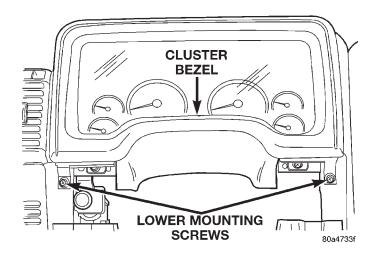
Cluster Bezel Lower Screws Remove/Install
